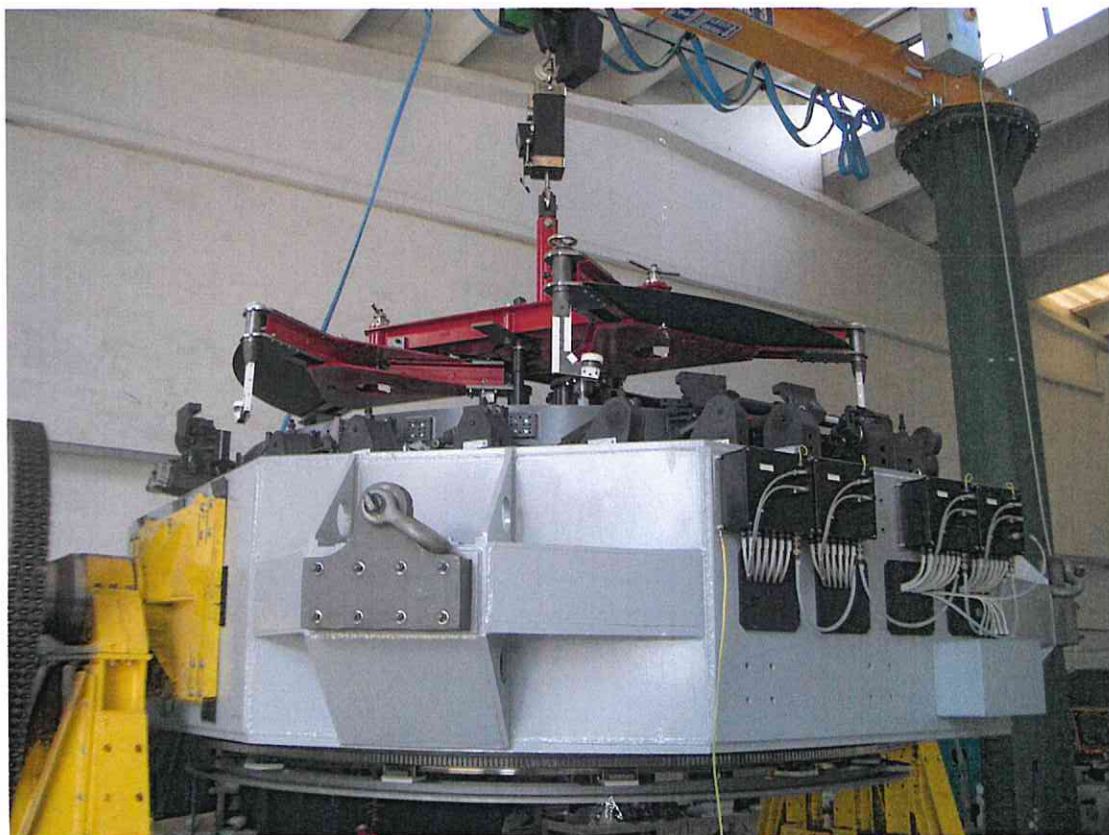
Primary mirror handling procedure (4/4): the handling device is removed
